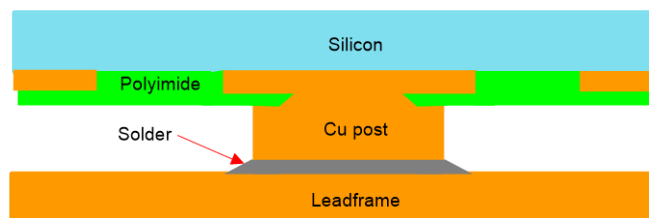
Cross Sectional Illustration of a Flip Chip Joint Inside HotRod and FC-SOT
